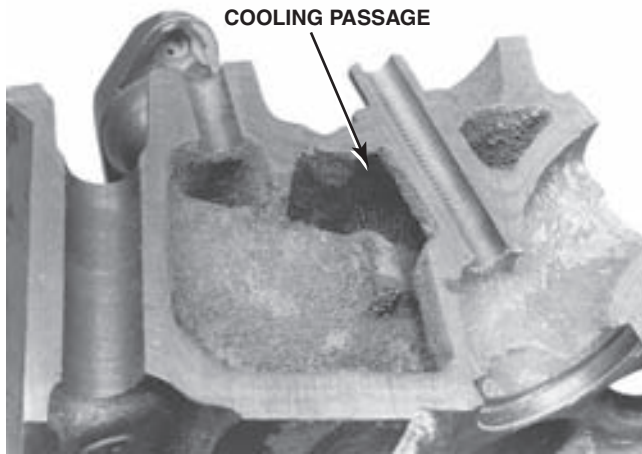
Coolant passages can be seen in this section of a cylinder head.
